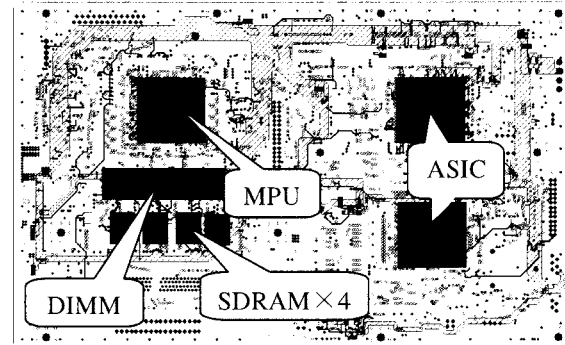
Power traces and device arrangement of SGGs controller PCB.
